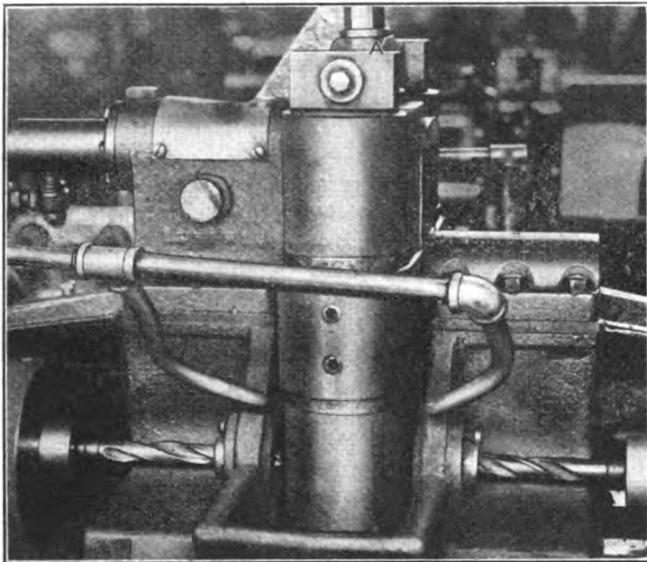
ROUGH-DRILLING THE PIN HOLES
